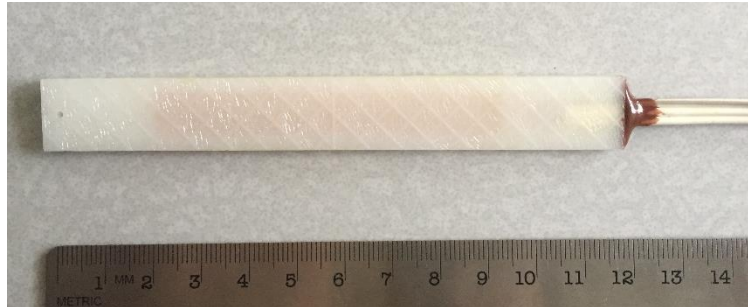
Embedded strain gauge for monitoring shrinkage deformation
